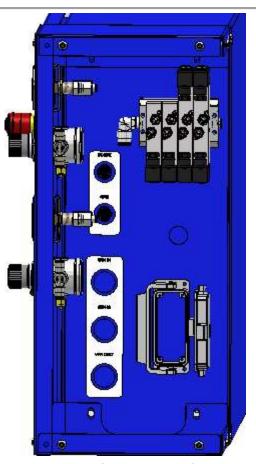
Right Side Pneumatic Controls (Cover Removed)
